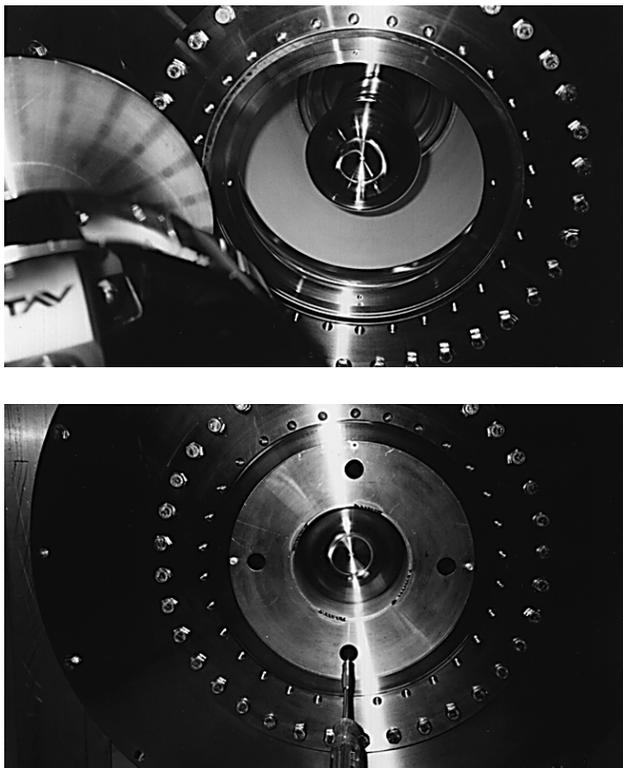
Upper View - Gun Assembly with Anode Removed; Lower View - Final Positioning of the Focus Electrode Using the Alignment Fixture.
